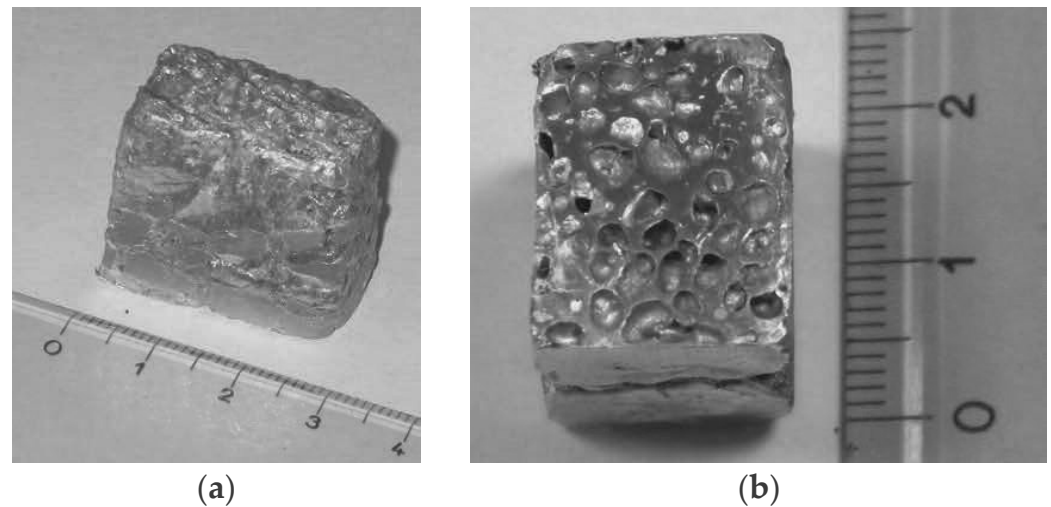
(a) Al foams manufactured with the powder compaction method. (b) Cross-section view of the Al manufactured foams after cutting.
